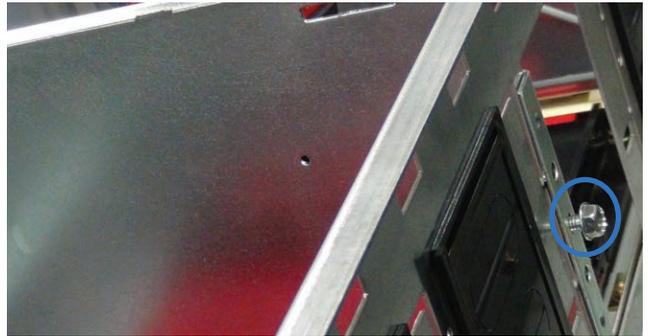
Assembling AFM unit shelf (Additional fastener)
